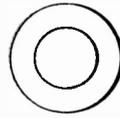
Ball or Collar Formed at Joint of Electrically Heated Pieces.
